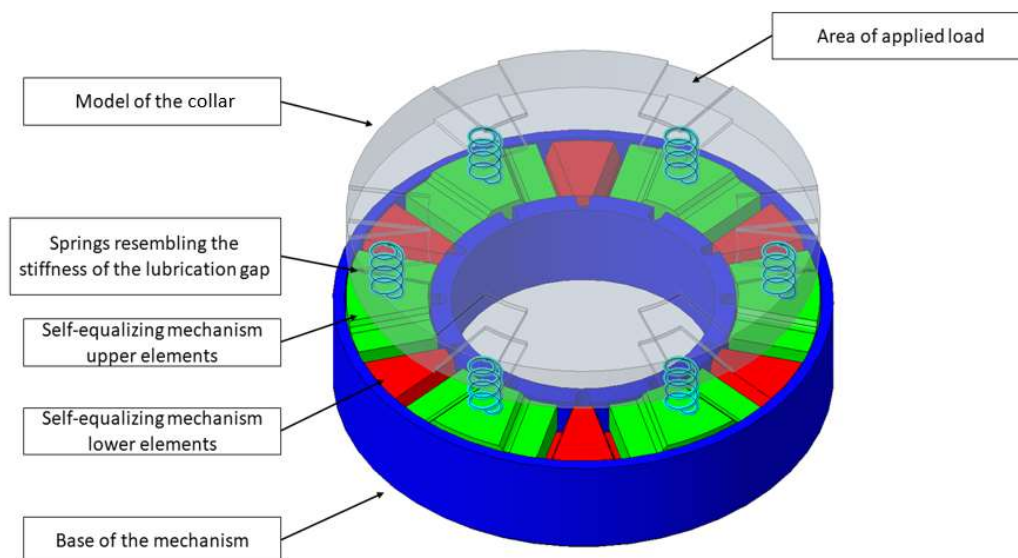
Bearing model for calculating self-equalized tilting pad thrust bearings
